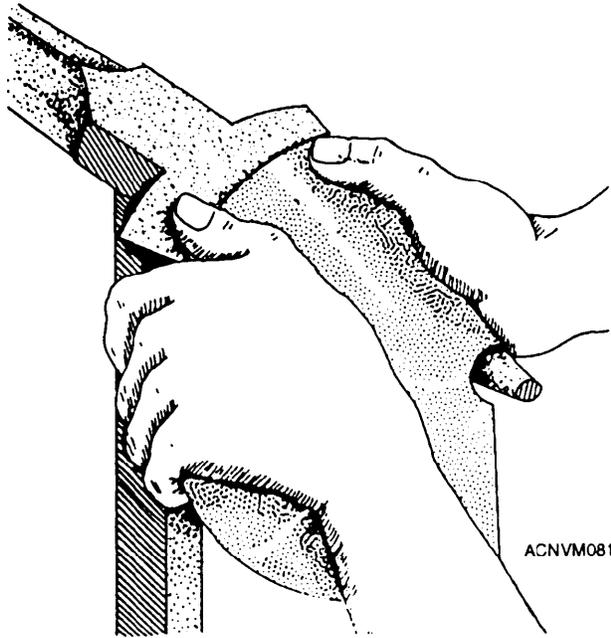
Hand forming a cone on a blowhorn stake.
